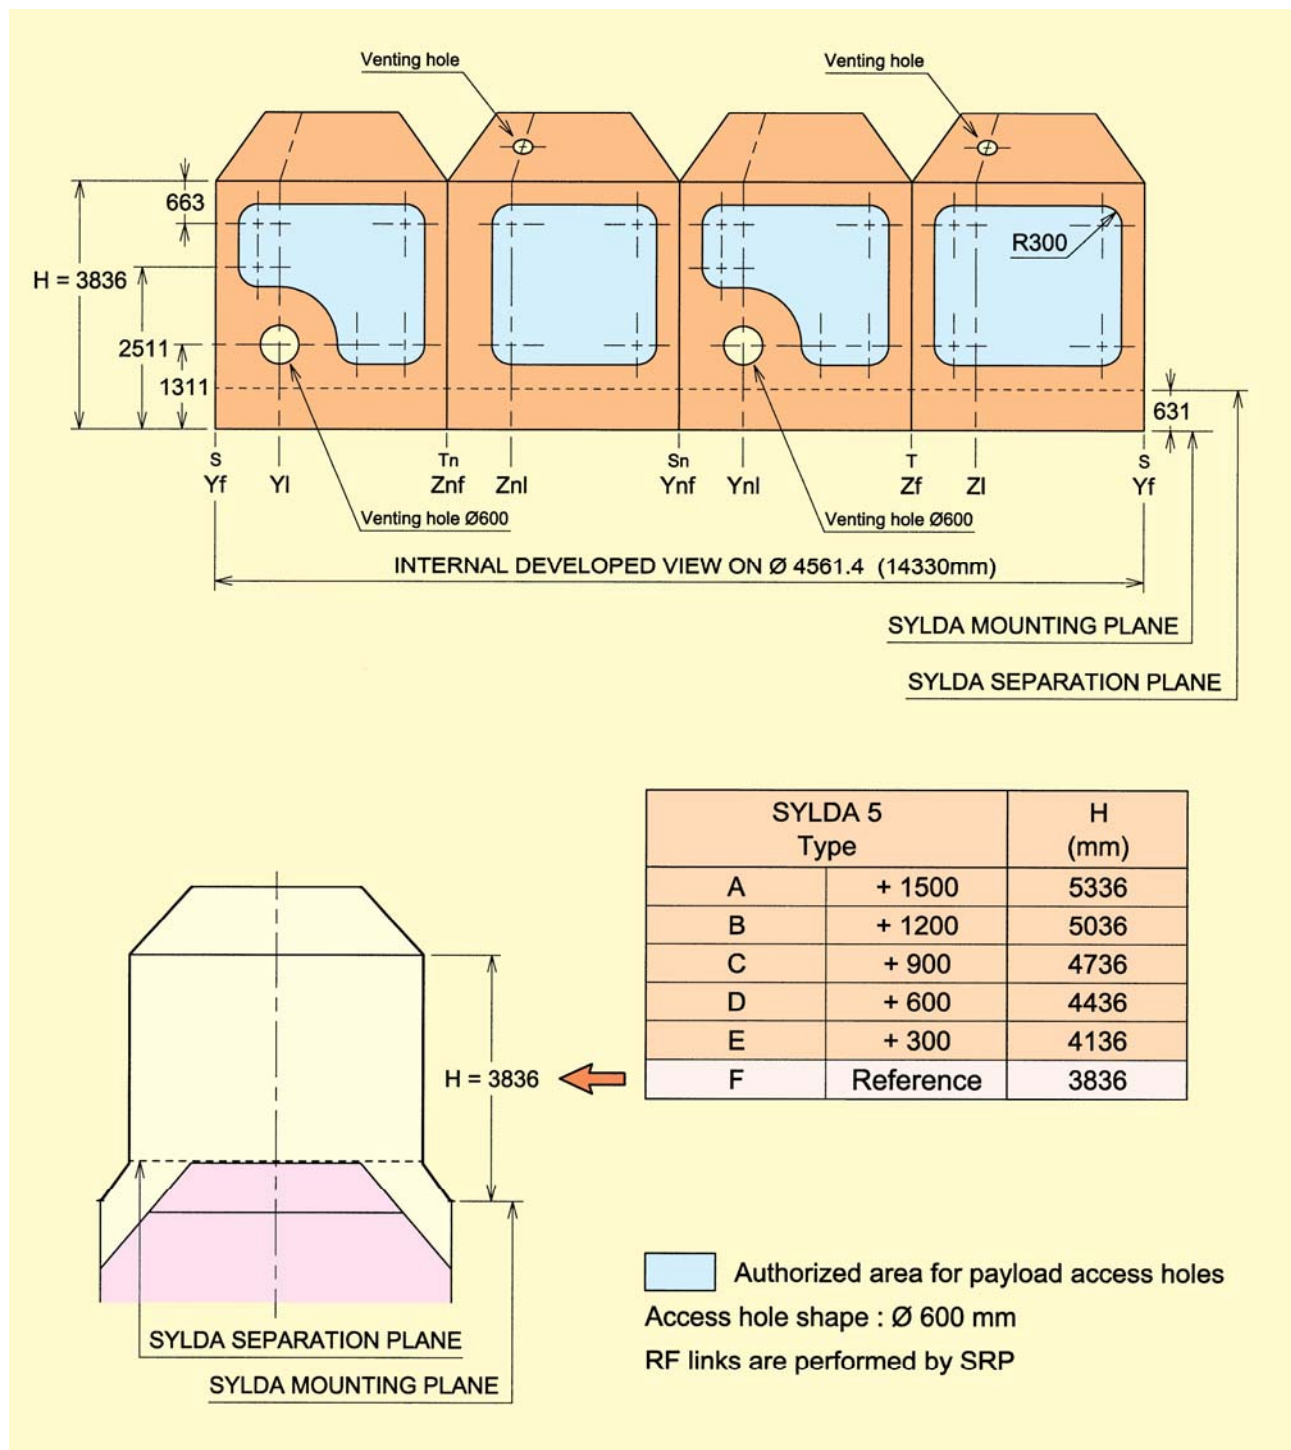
SYLDA5: locations and dimensions of access holes
